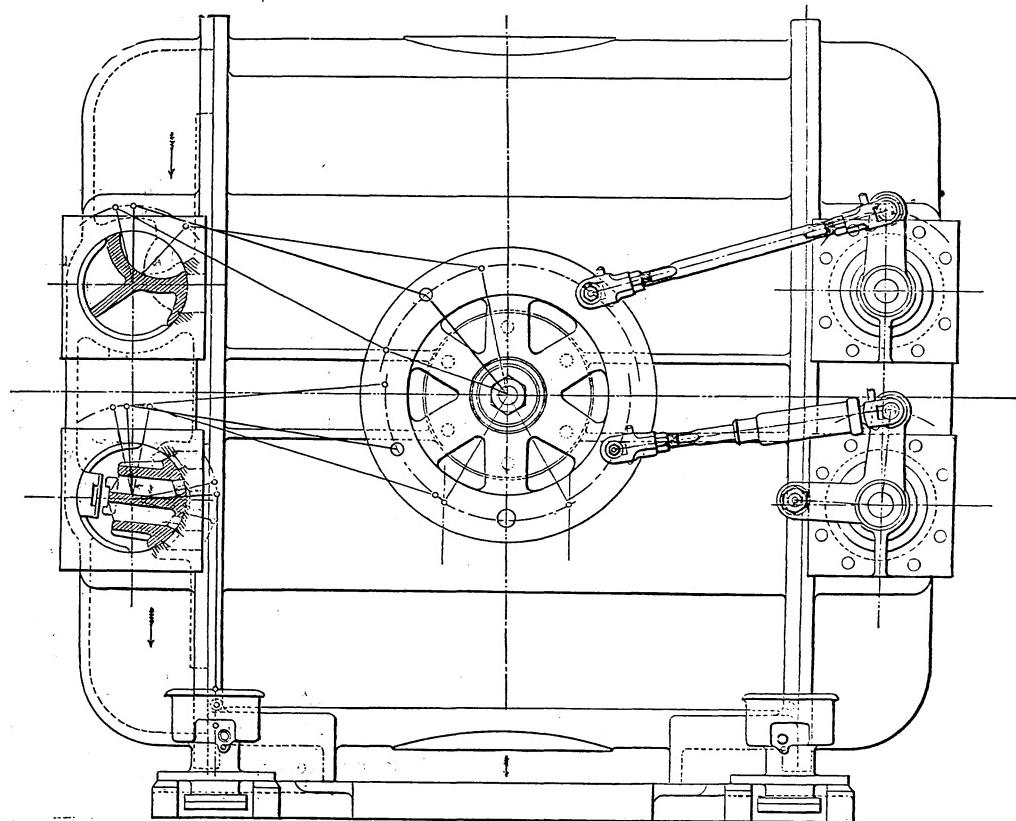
Elevation of Air Cylinder and Valve Gear.
